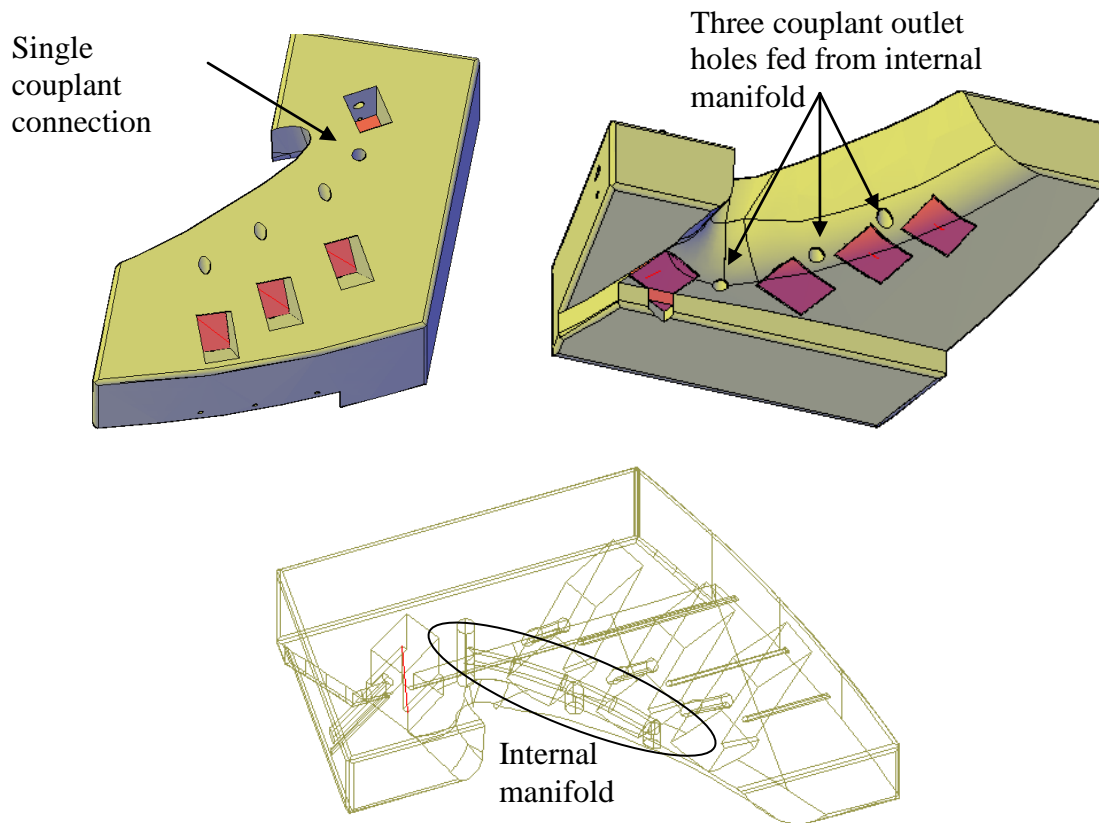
Inlet side inspection jigs with clamping screw holes and couplant exhausts
